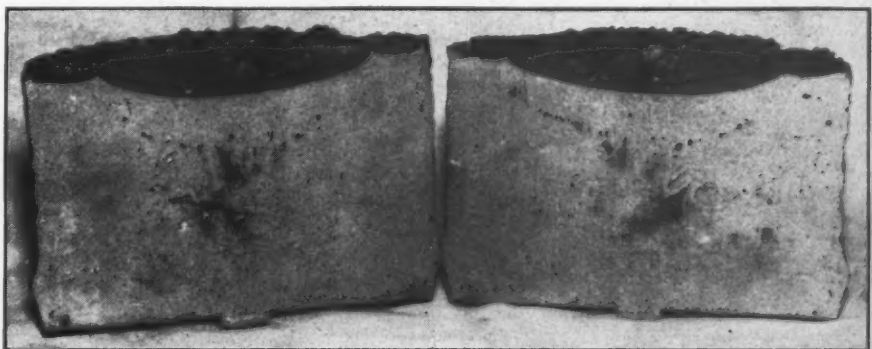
Sectioned riser from propeller casting showing amount of shrinkage when conventional carbon-free liquidizer is used. Riser, 9½-in. diameter.
